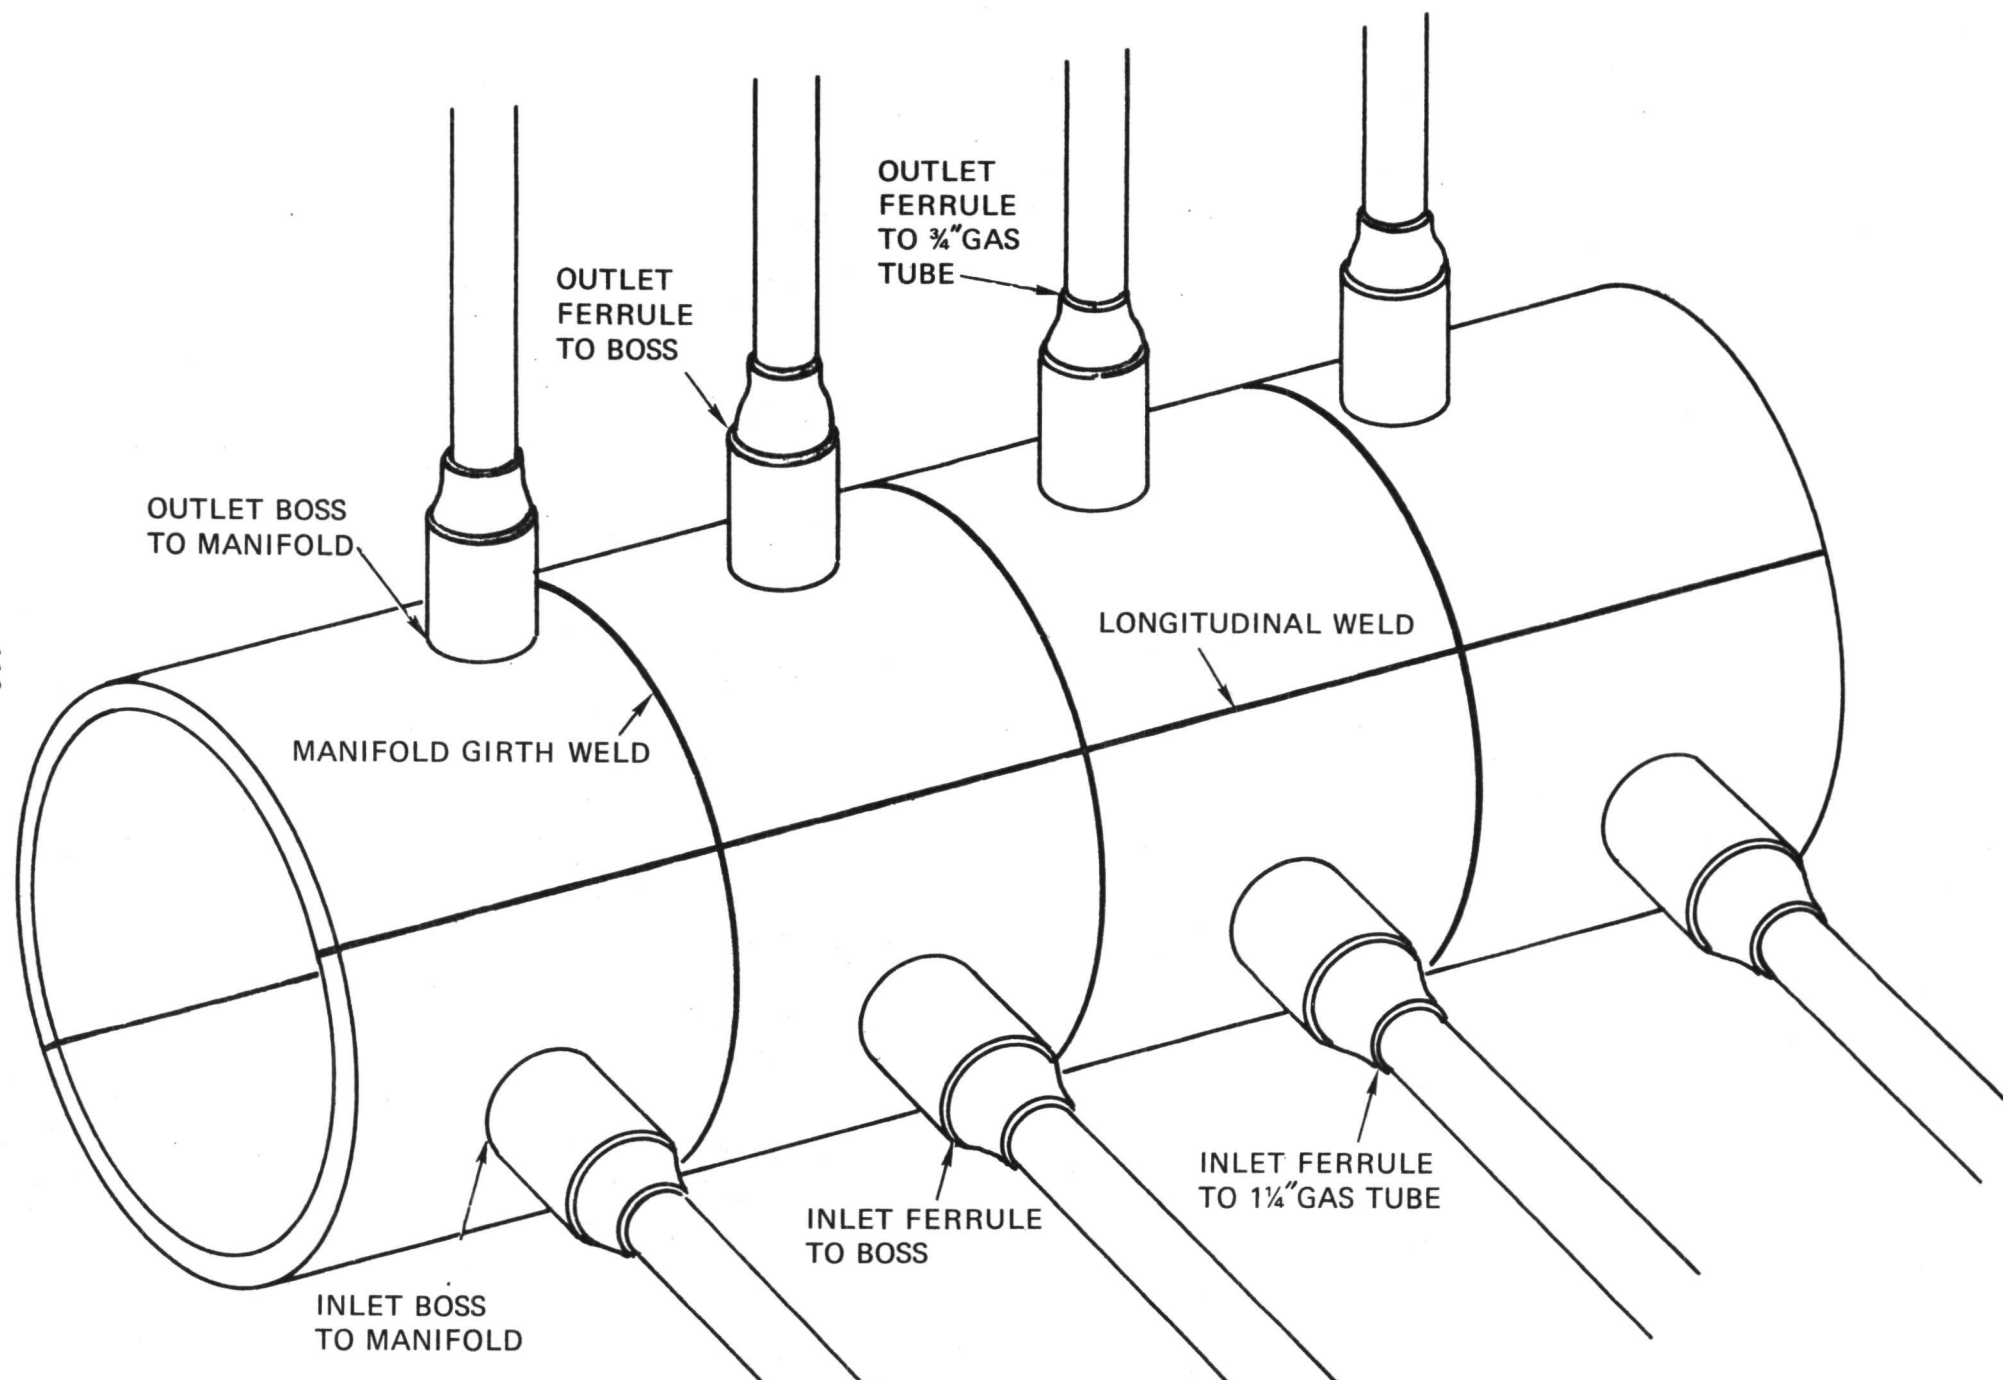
Brayton Cycle Heat Receiver Weld Qualification Tests.
